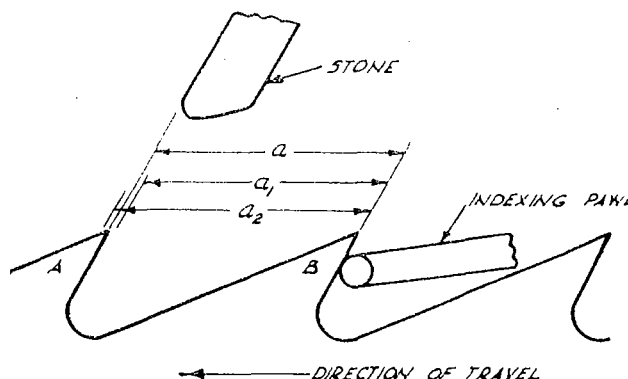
Correct setting of indexing pawl. Tooth before stone is engaged and tooth pitches are automatically made uniform.
